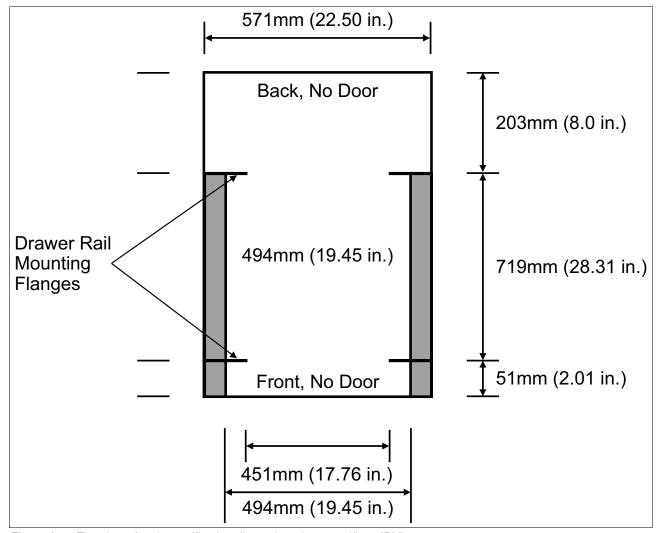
Top view of rack specification dimensions (not specific to IBM)
